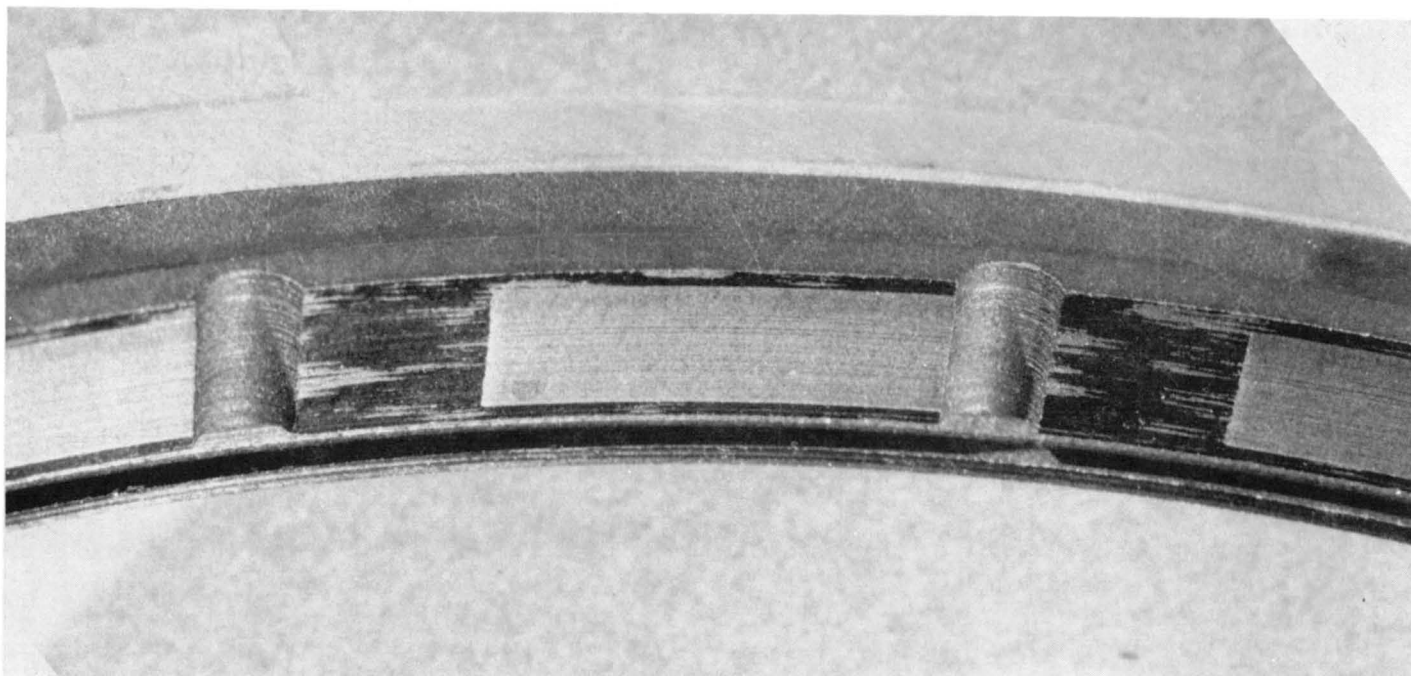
Helium Seal Typical Turbine Side Carbon Ring 99RS006215, S/N 03, Posttest 295, Build 20 After 9.6 Hours
